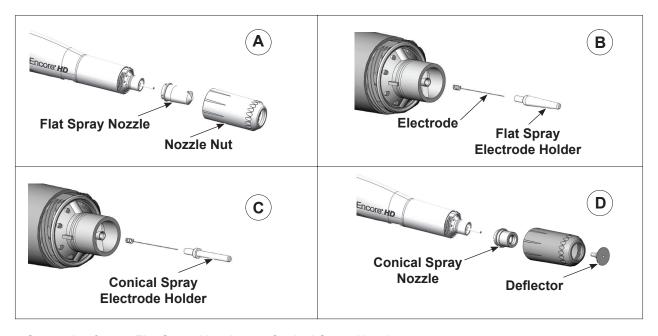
Converting from a Flat Spray Nozzle to a Conical Spray Nozzle
